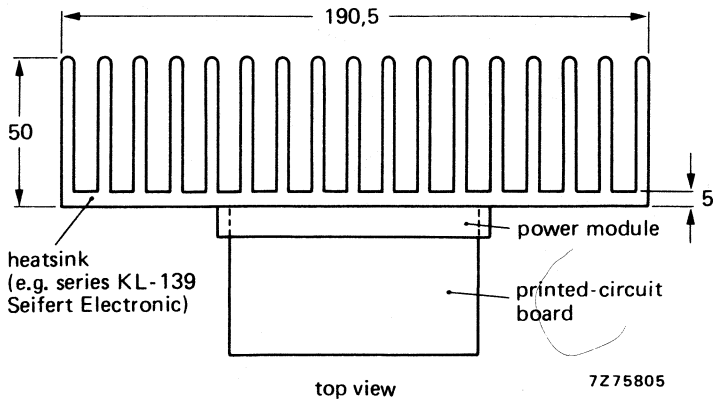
Example of a heatsink to be used for the module; dimensions in mm.
